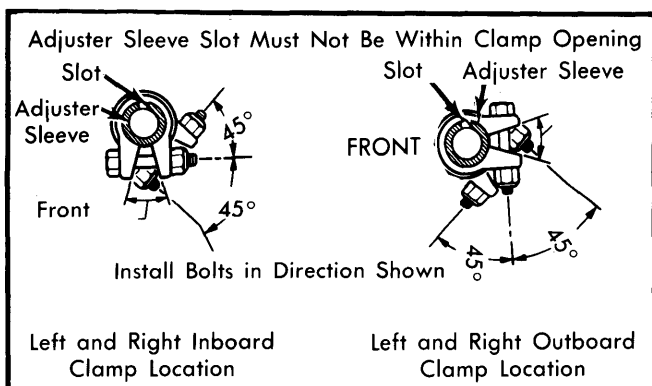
Tie Rod Clamp Positioning (Corvette)
